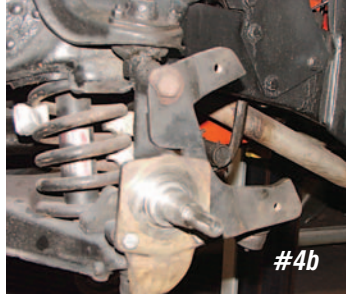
& 4b: Remove the dust cap, cotter pin, spindle nut and washer and the brake rotor can be removed from the spindle.
